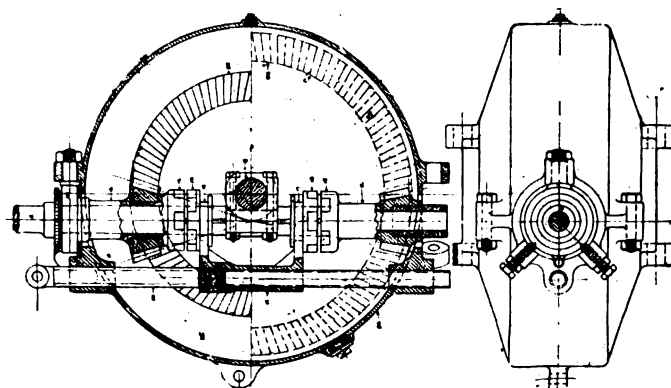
VERTICAL SECTION AND END VIEW OF GEAR BOX.
